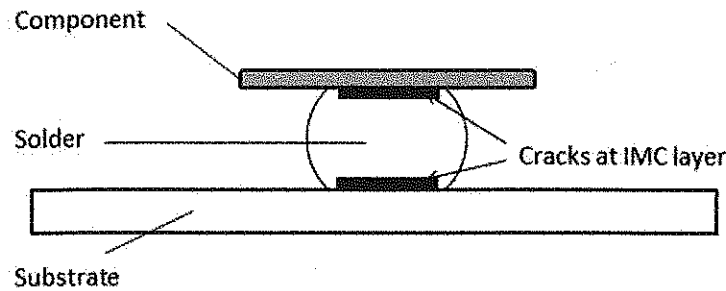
Possible locations of cracks at IMC layer of solder joints
